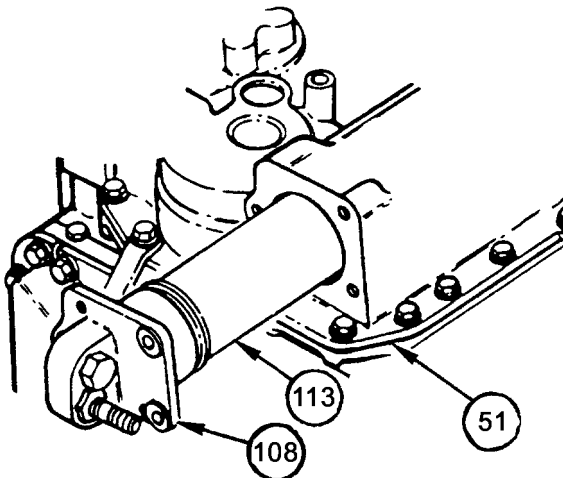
Oil Filter Head Assembly and Oil Filter Element
